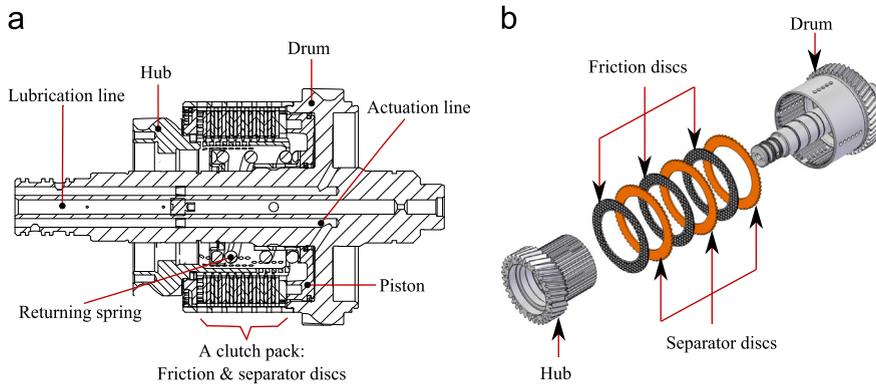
The configuration of a multi-disc wet friction clutch, (a) cross-sectional and (b) exploded view.
